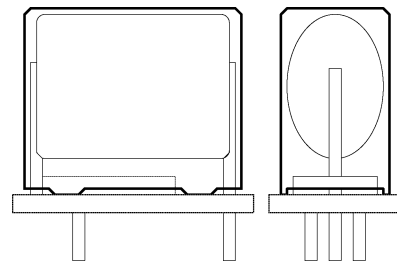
Example fixture used to position the winding flush with the bottom of the capacitor casing for repeatable alignment and joining with the capacitor.
